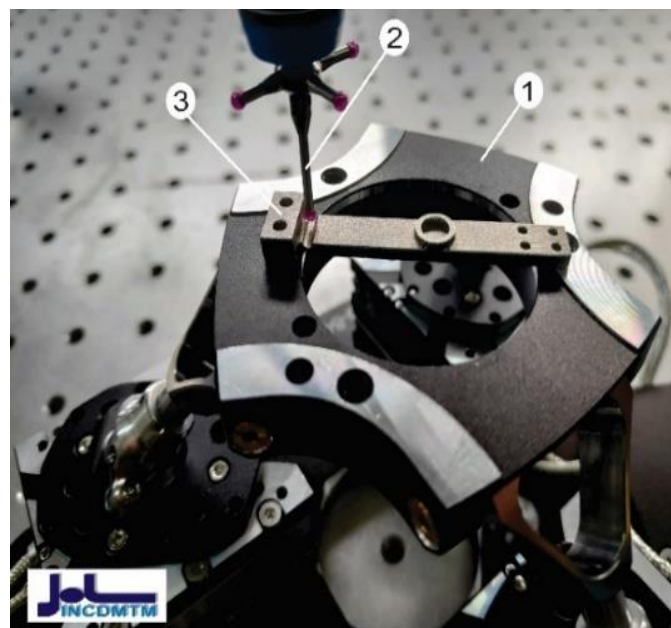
Measurement process with mechatronic system probe stylus – view 2
